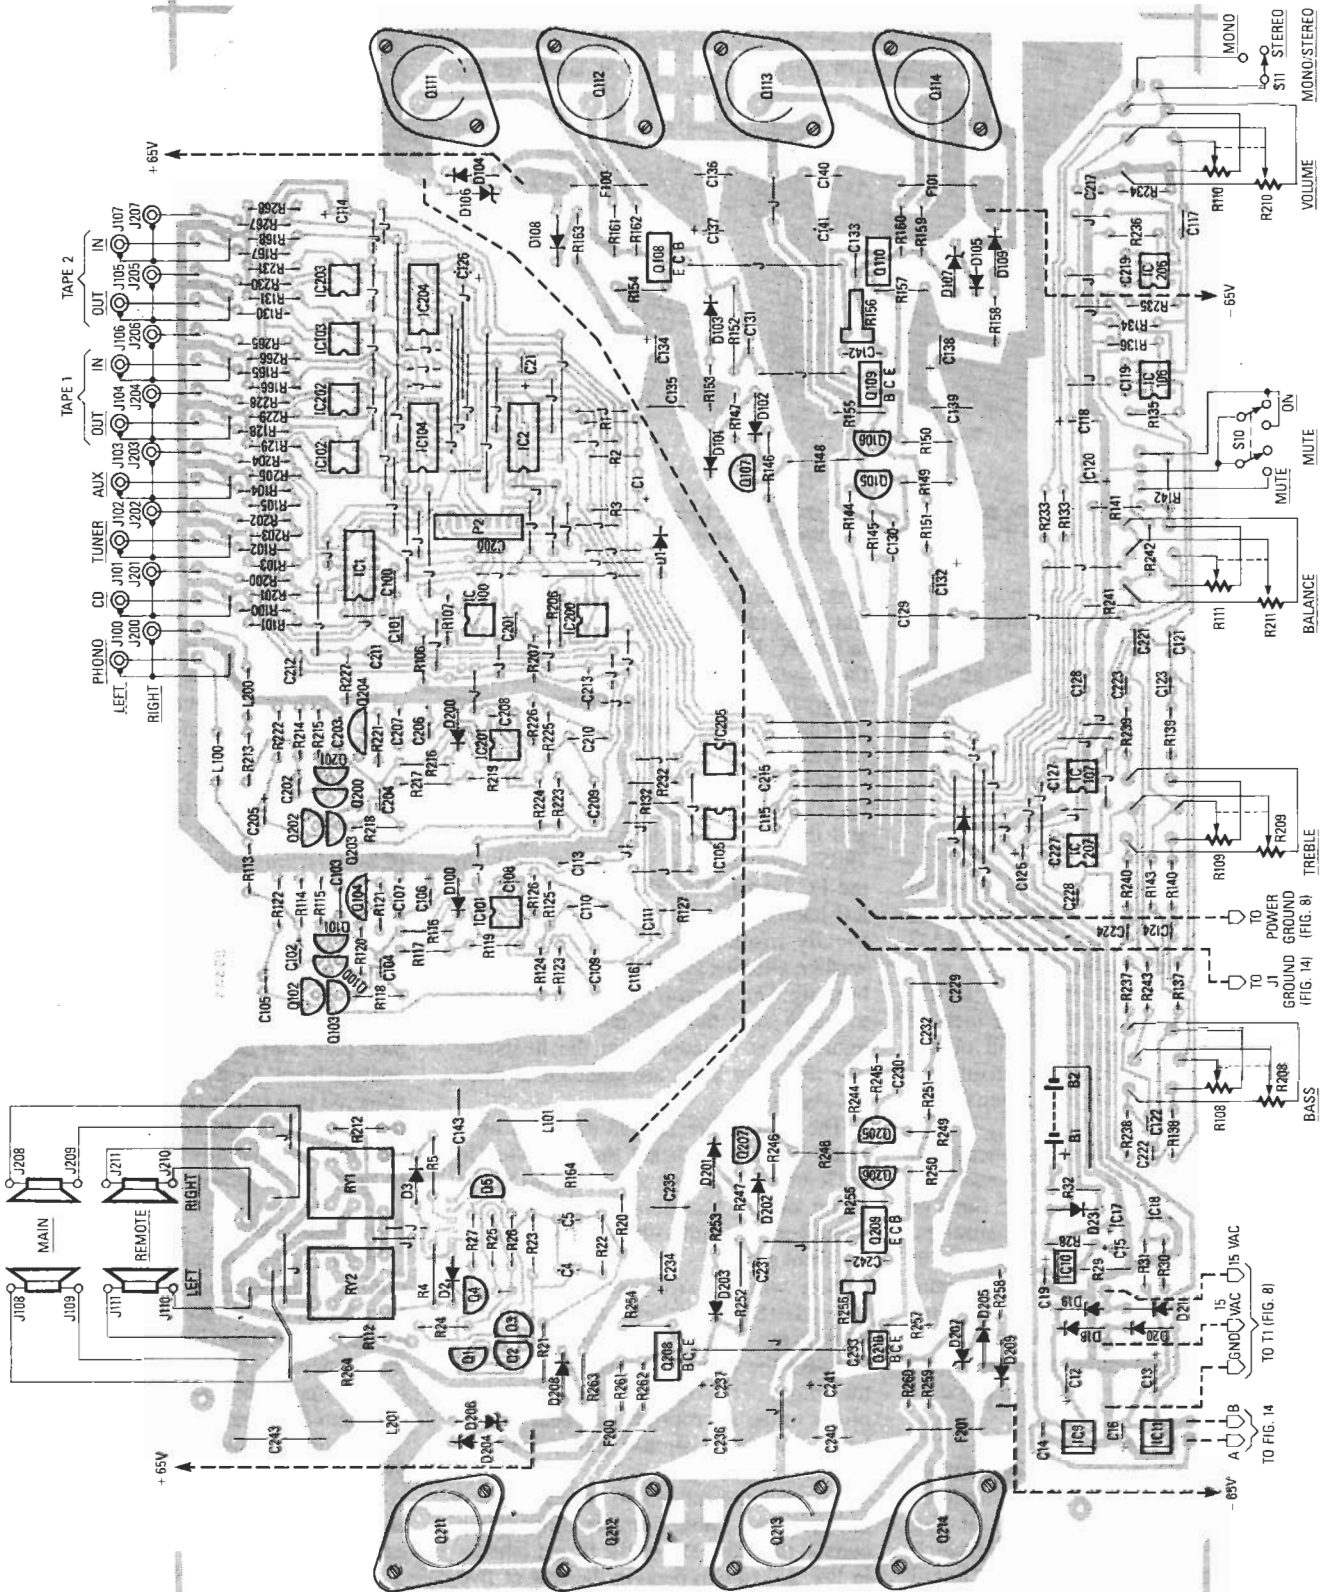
MOUNT THE MAIN-BOARD COMPONENTS as shown here. A heavy jumper wire must connect the pad near Q111 to the pad to which R164 and L101 are soldered. Also, several additional wires (shown at the front left side of the board) are routed beneath the board.
